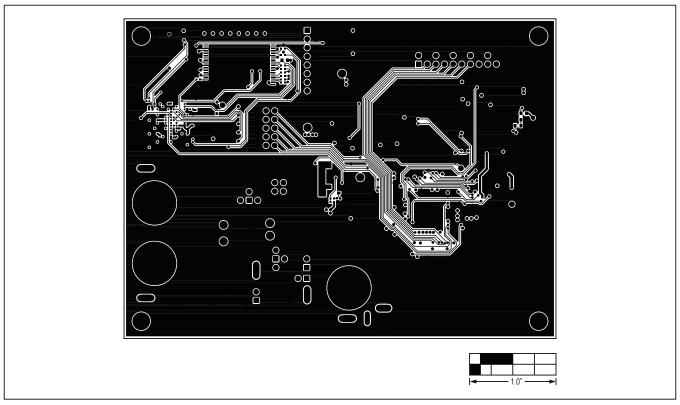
MAX98356 EV Kit PCB Layout—Solder Side
